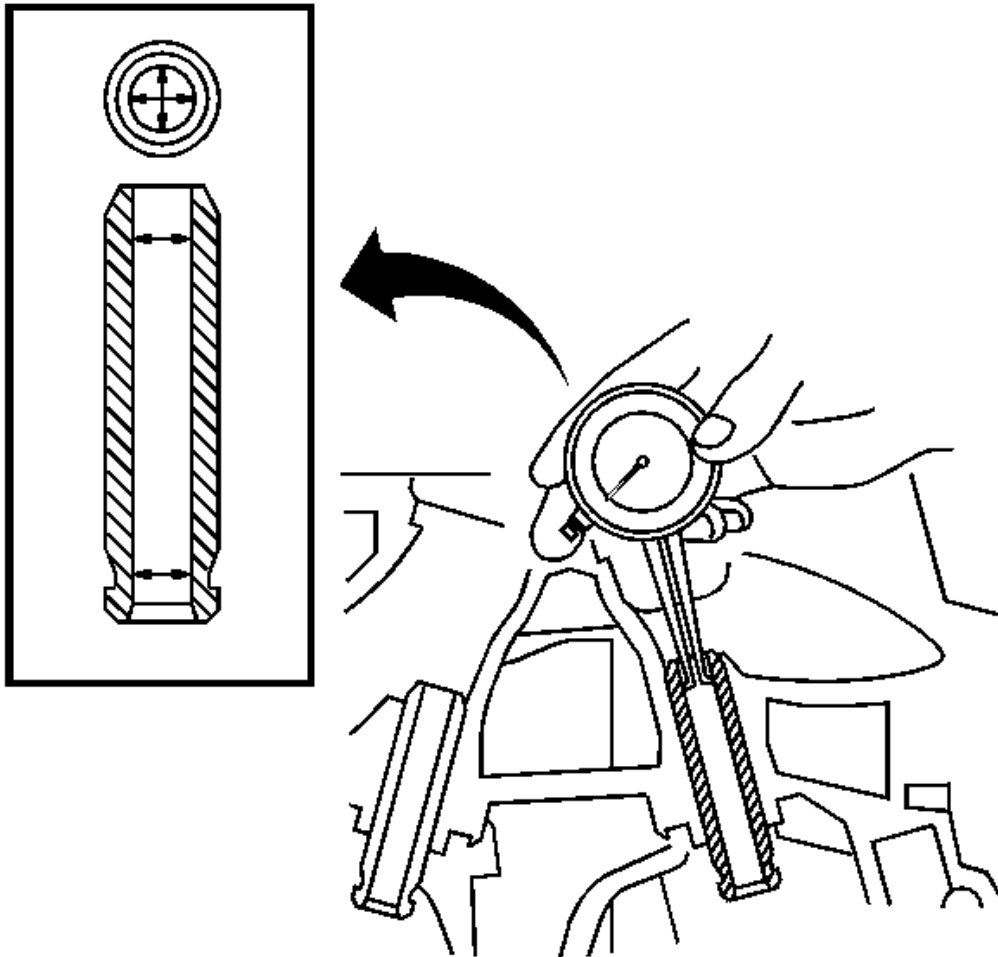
Inspecting Valve Guide Bush Oil Clearance
